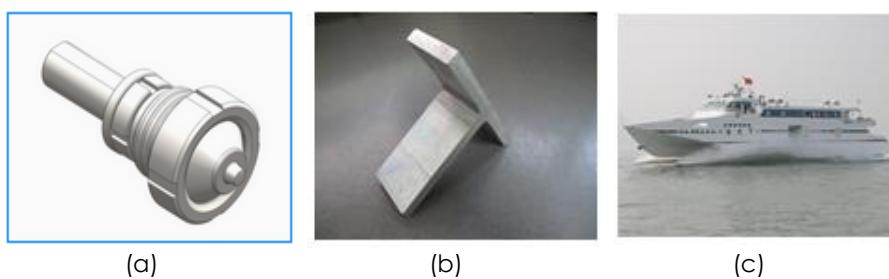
(a) Corner stationary shoulder FSW tool model type; (b) 8 mm thickness Al-alloy Corner Seam Sample welded by stationary shoulder FSW; (c) Corner Stationary Shoulder FSW Tool Application in shipping
